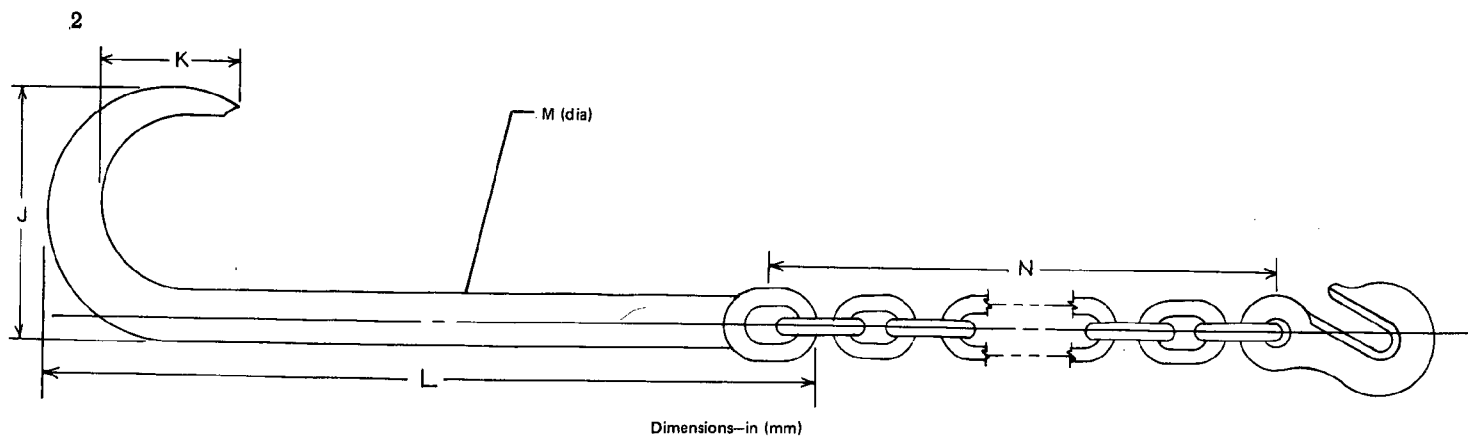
J-HOOK CHAIN ASSEMBLY FOR USE WITH TOWING SLING
